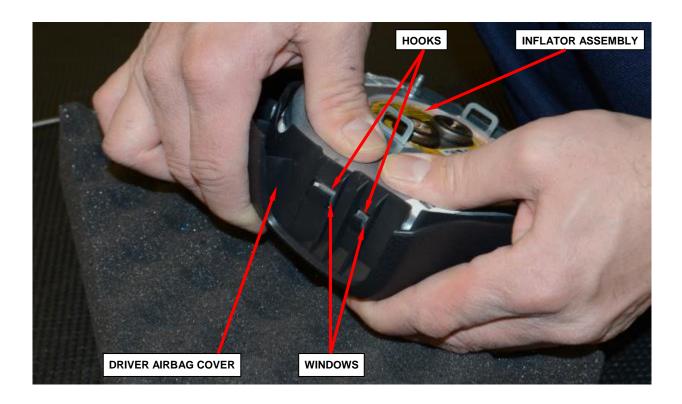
Left Side Driver Airbag Cover to Inflator Assembly Hooks
